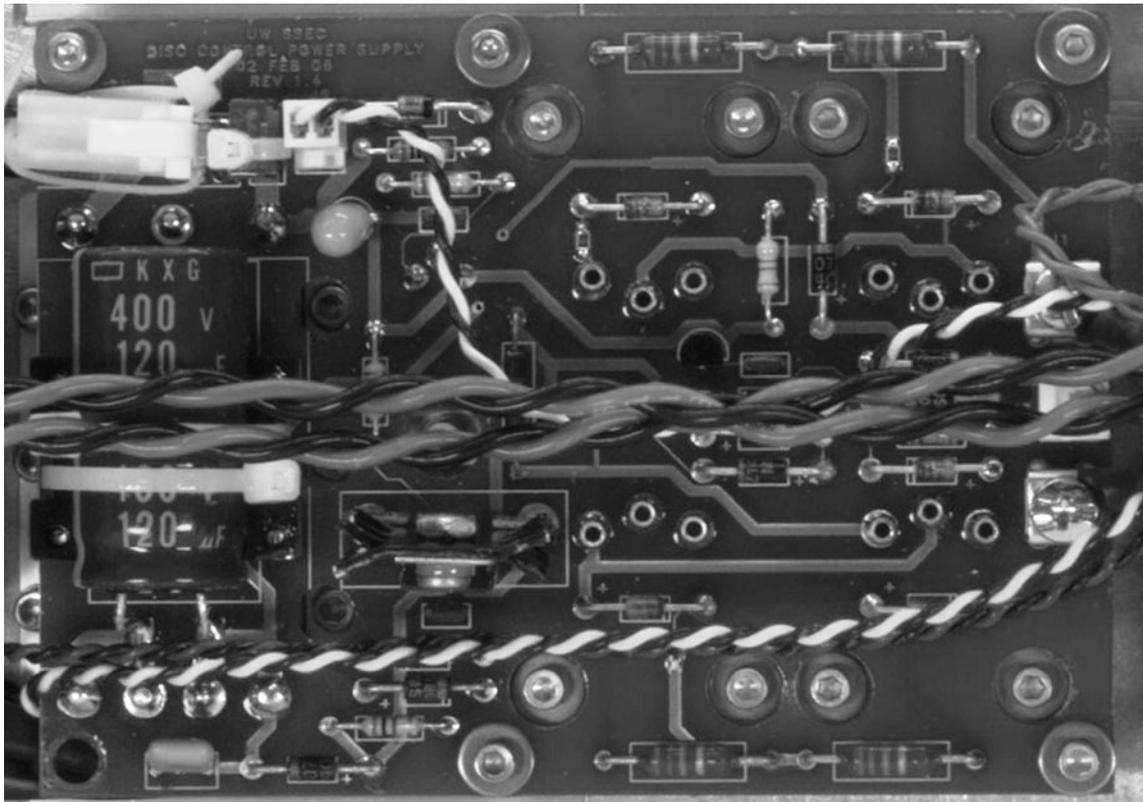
Control power supply. The CPS is implemented using a simple linear regulator (note the low amount of components on the circuit board). The pass element of the linear regulator is implemented using MOSFETs located between the circuit board and the base plate. The size of these large components determines the overall size of the CPS.
